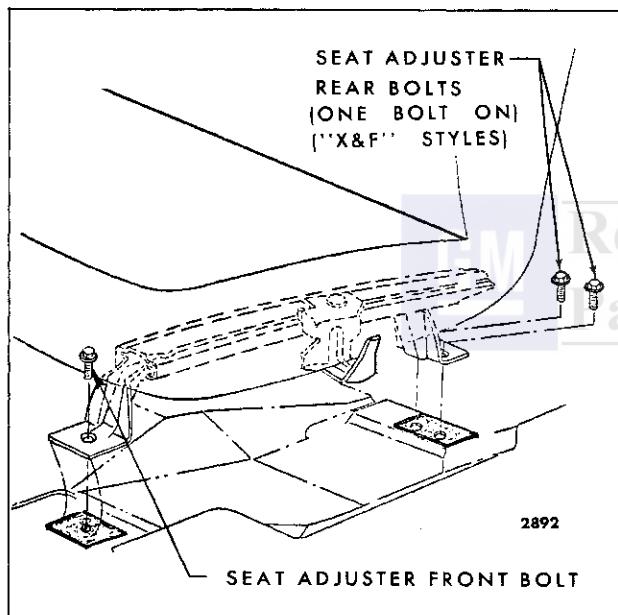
Seat Adjuster Floor Pan Attachment — "A, F, X & Z" Full Width Seat
